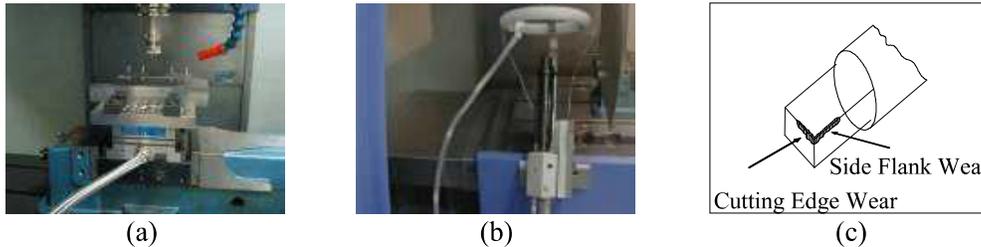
(a) Experimental setup; (b) Machine vision system; (c) Tool wears phenomena
